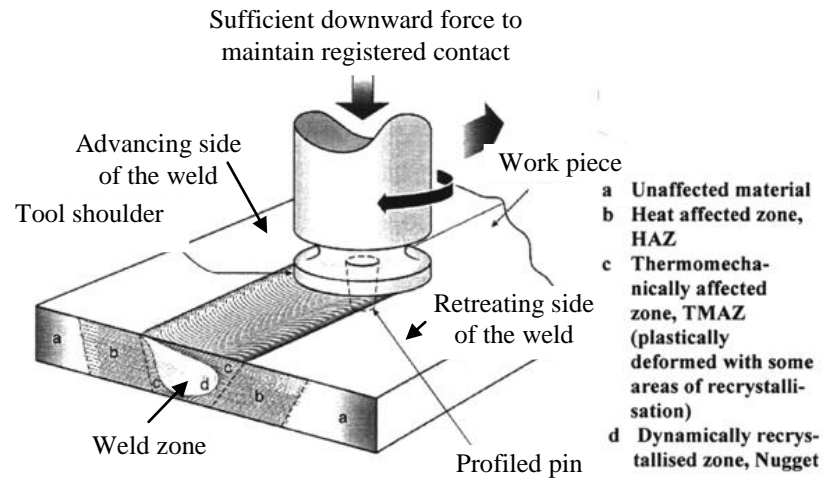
Principle of friction stir welding (L. Boehm, 2004)
